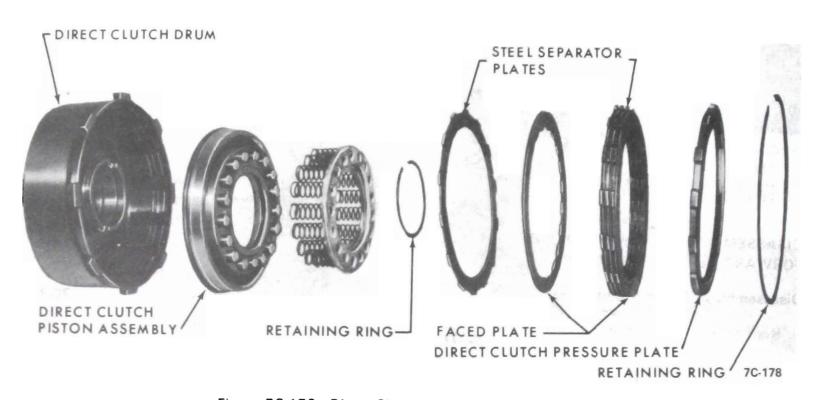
C-178 - Direct Clutch Assembly - Exploded View
